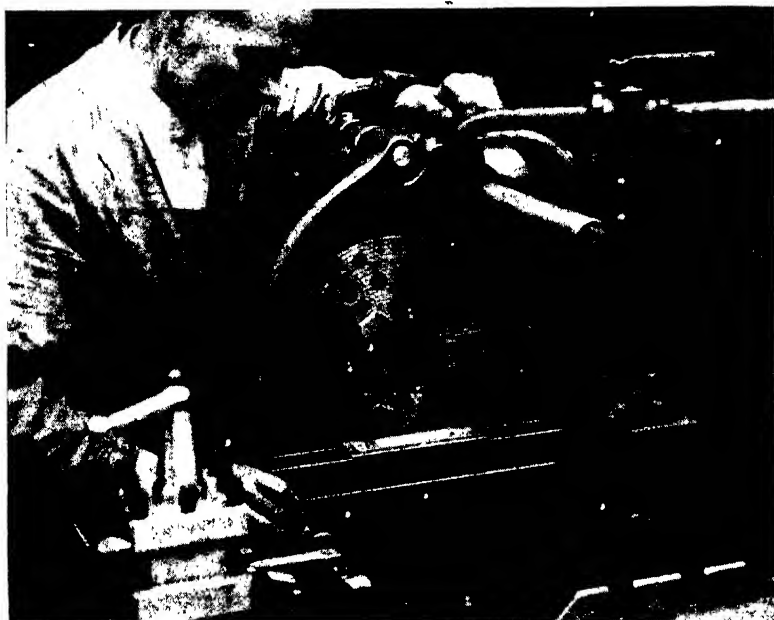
TESTING MACHINE BED FOR ALIGNMENT
